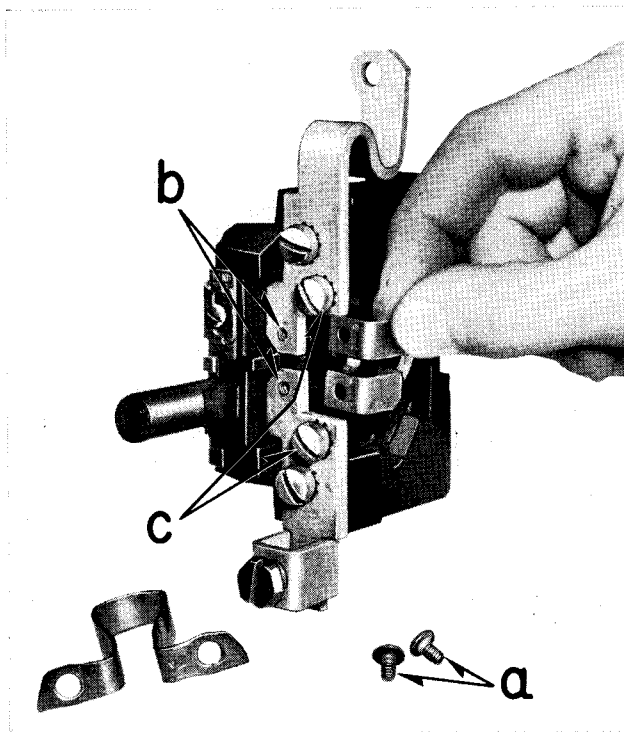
Install "B" code heater in the relay, using screws "a" threaded into holes "b". The "C" code heater (shown below relay) is held by larger screws "c". Be sure the looped portion enters the recess in the relay.
